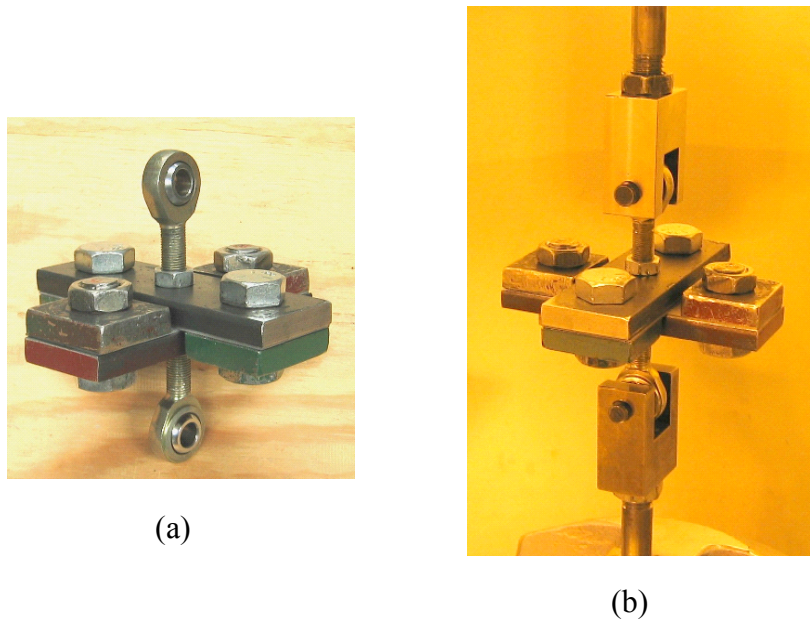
Set-up for the static cross-tension specimen test; (a) test fixture and (b) set-up at MTS machine
